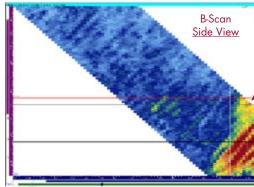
Representative ultrasonic B-Scan of a 28" to 29" OD, 2.0" to 2.5" T_{nom} pipe-to-pipe, with tapered weld surfaces.
